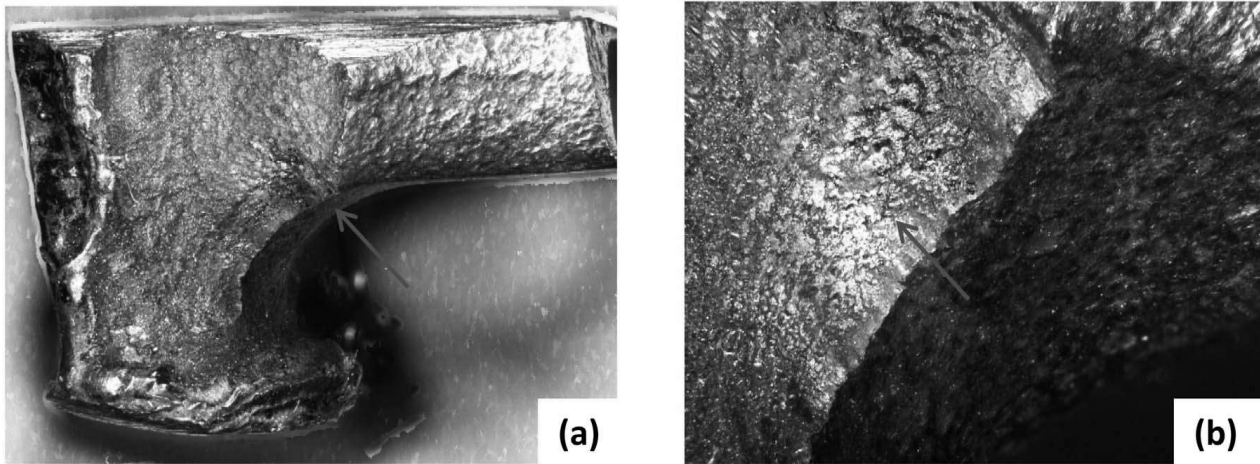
Digital microscope images of ENG1: (a) Digital microscopy reveals heat tinting marks on the fracture surface; (b) Close up showing heat tinting near surface which suggests crack initiation point indicated by the red arrow.
